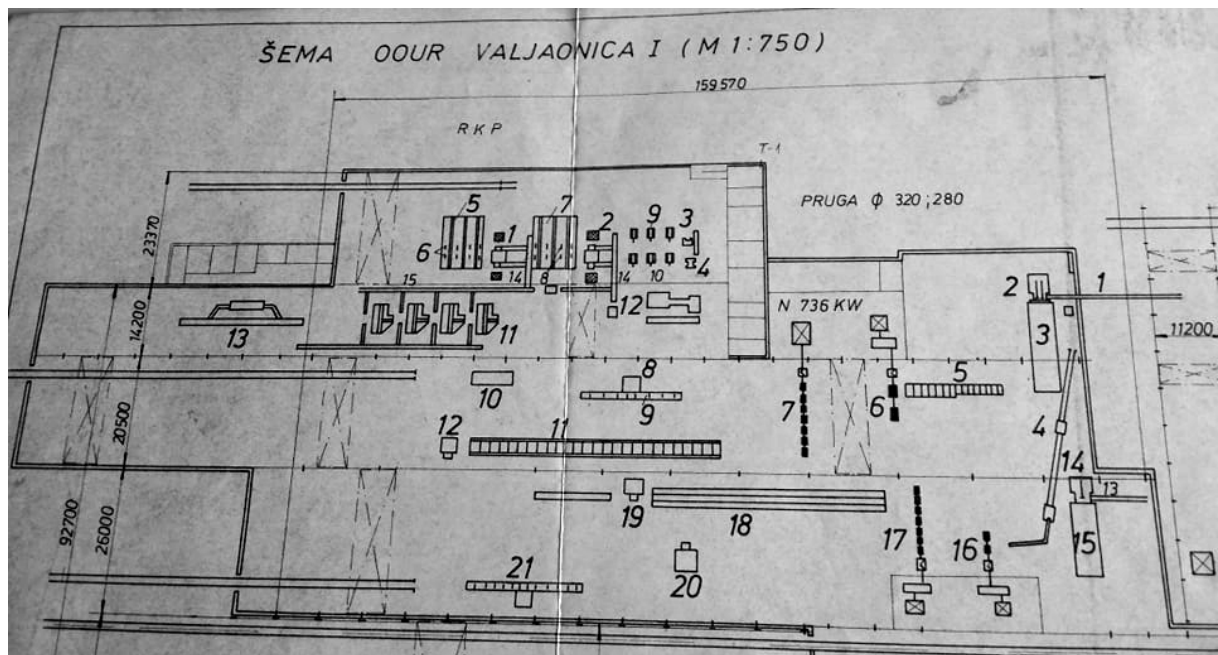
The layout of the oldest light section rolling mill in the IRON AND STEEL WORKS – ZENICA (built in 1893. [2])
